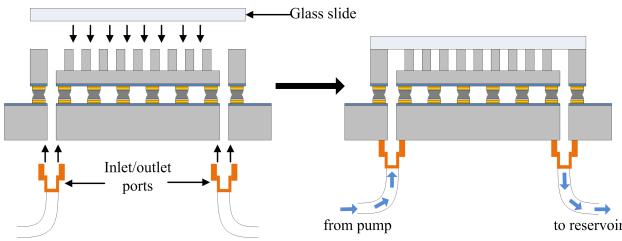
Capping the micropin-fin heat sink and attaching inlet/outlet ports and tubes.
